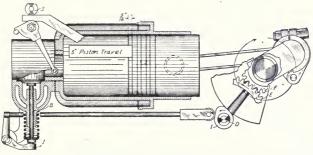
End of Working or Third Stroke in a Four-Cycle Engine. Cadillac Motor Car Company, Detroit, Mich.
